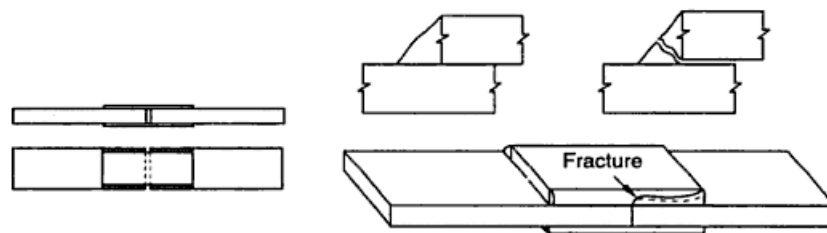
Position of Fracture in Side Fillet Welds
